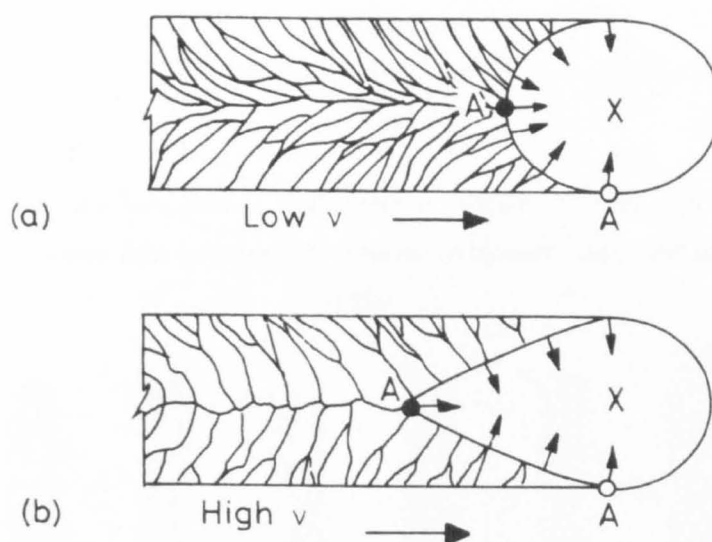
Shapes of weld pools at high and low welding speeds (after Porter 1988)
